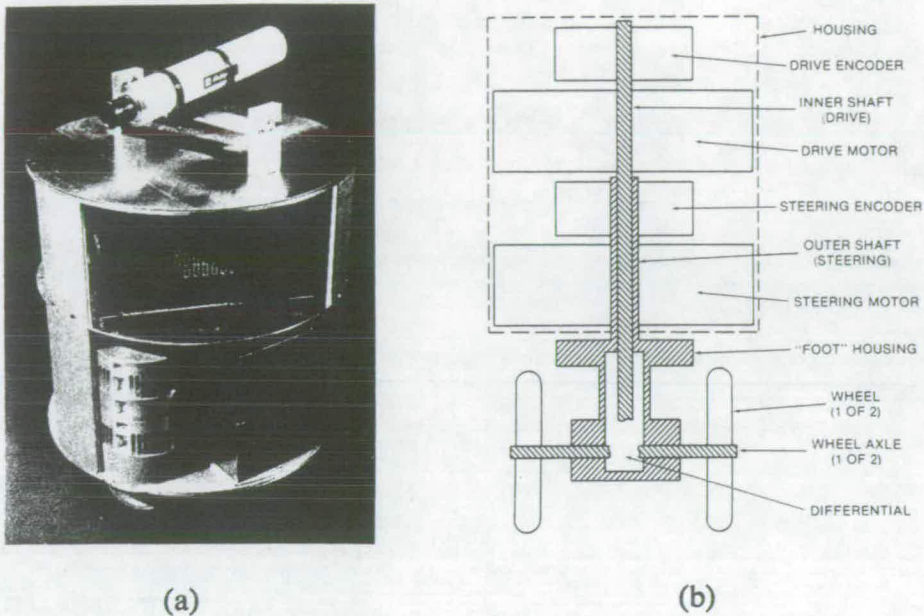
(a) CMU Rover (b) The CMU Rover wheel drive assembly (cross section)
